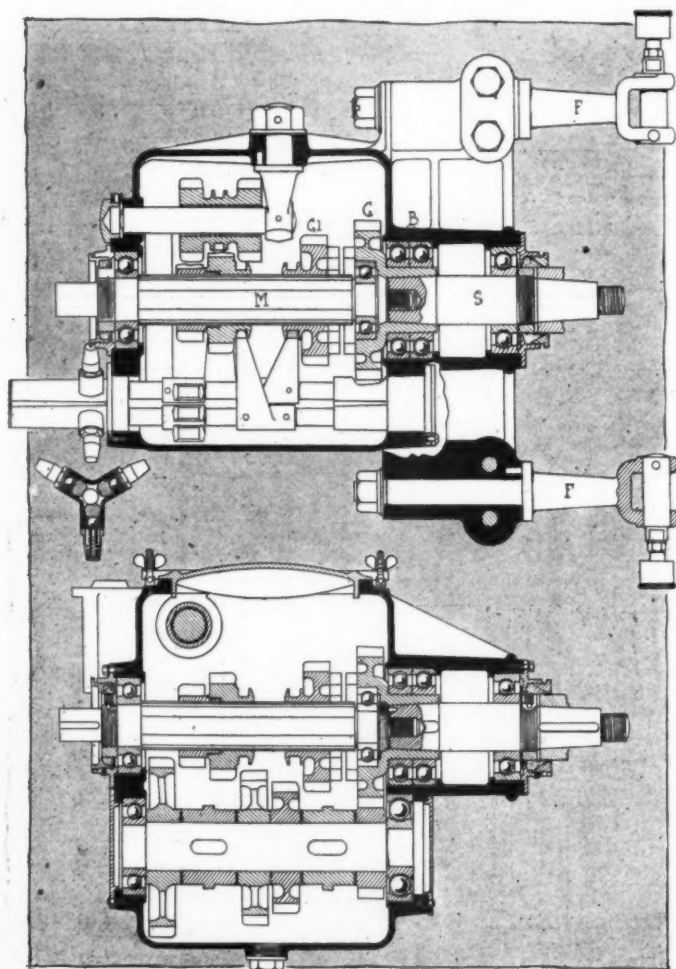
Sectional plan and elevation of the Fiat gearset, showing the arrangement of the shifter dogs and the mounting of the shafts on single and double ball bearings. The mainshaft extends practically throughout the length of the case
